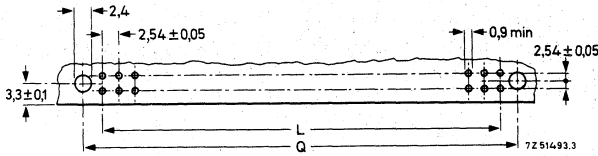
Hole pattern for board mounting of female parts; see Table 4 for dimensions L and Q.
